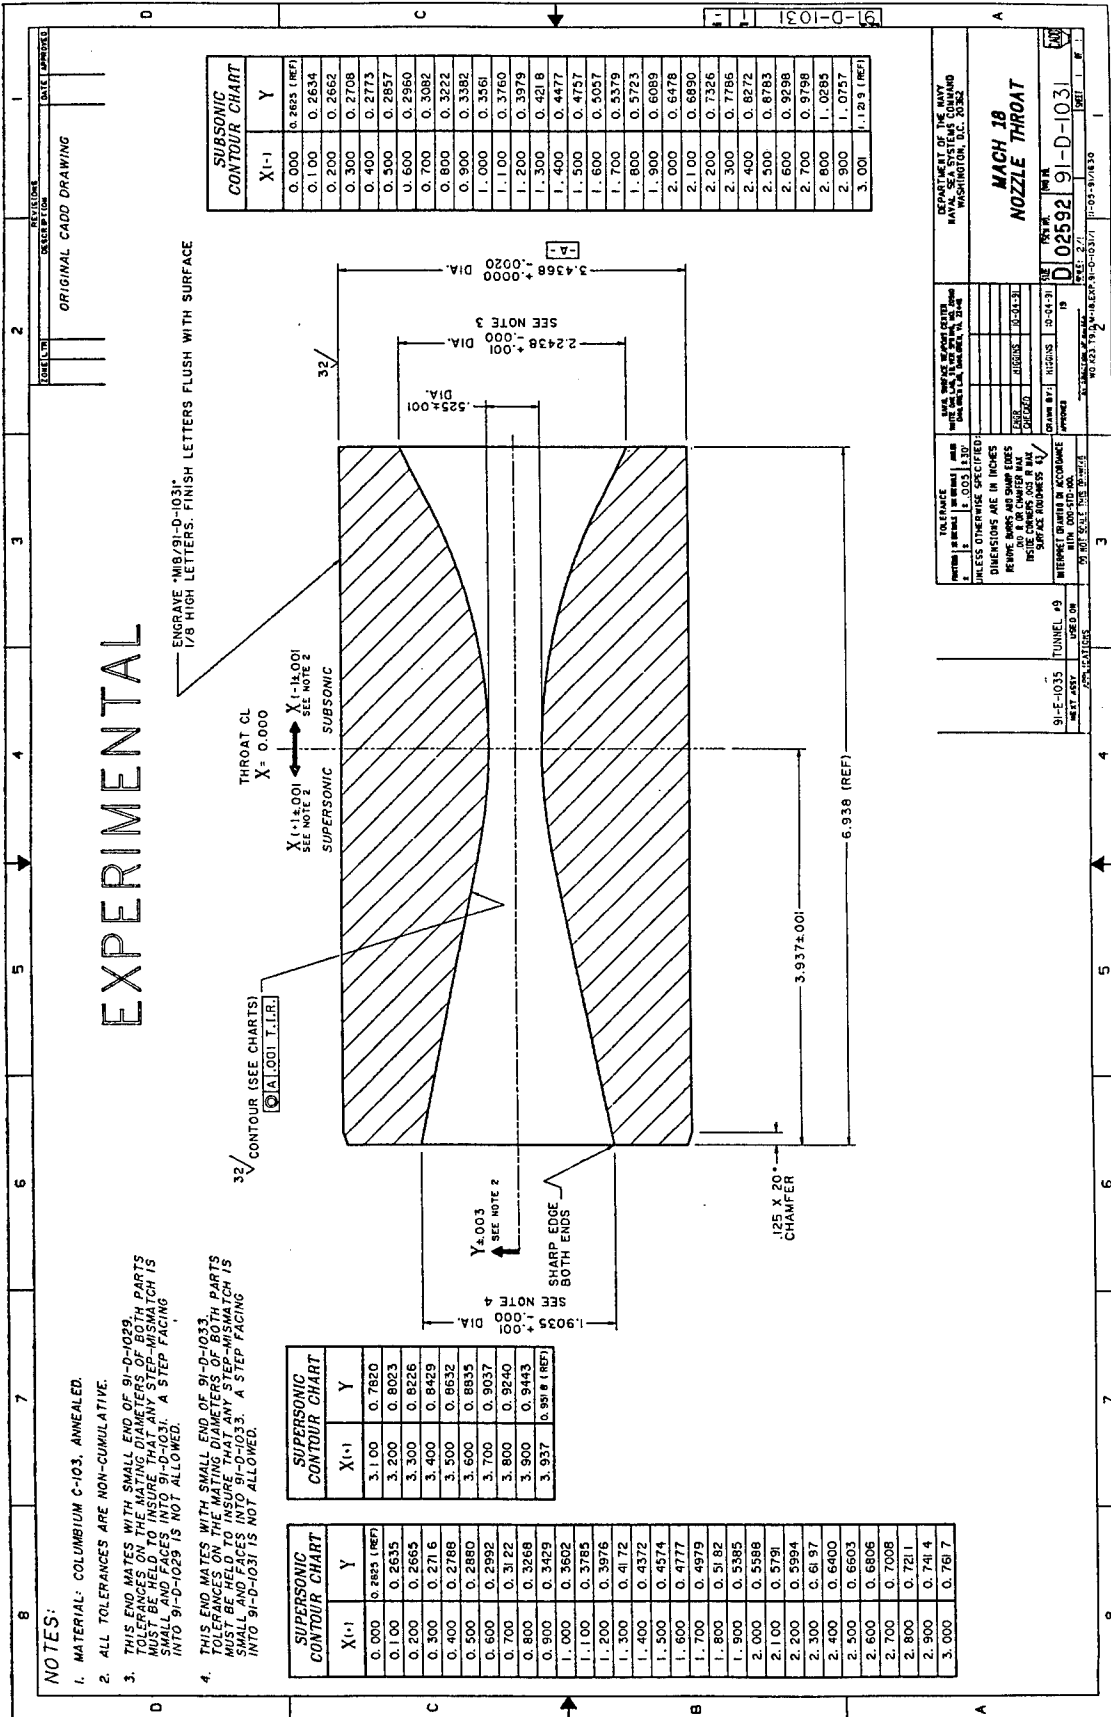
MACH 18 NOZZLE THROAT SECTION
